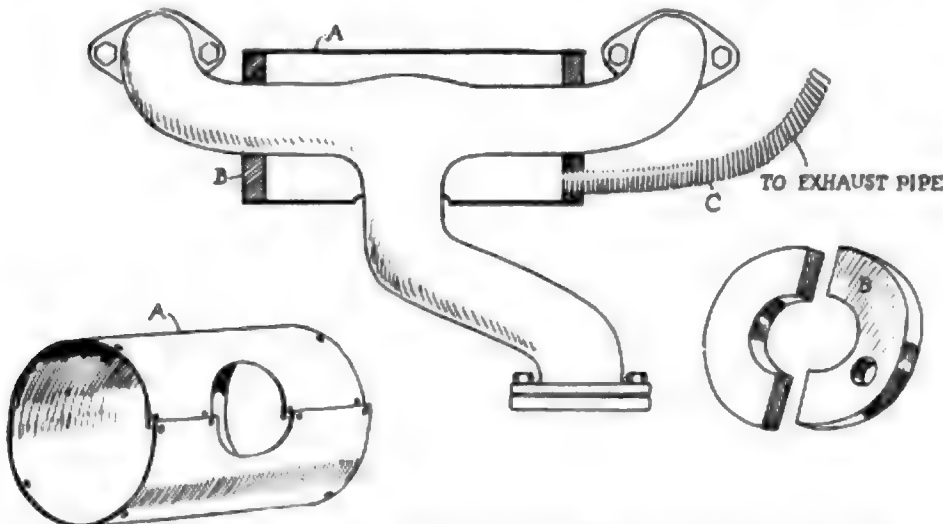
Suggestion for method whereby the intake manifold of the engine may be heated
